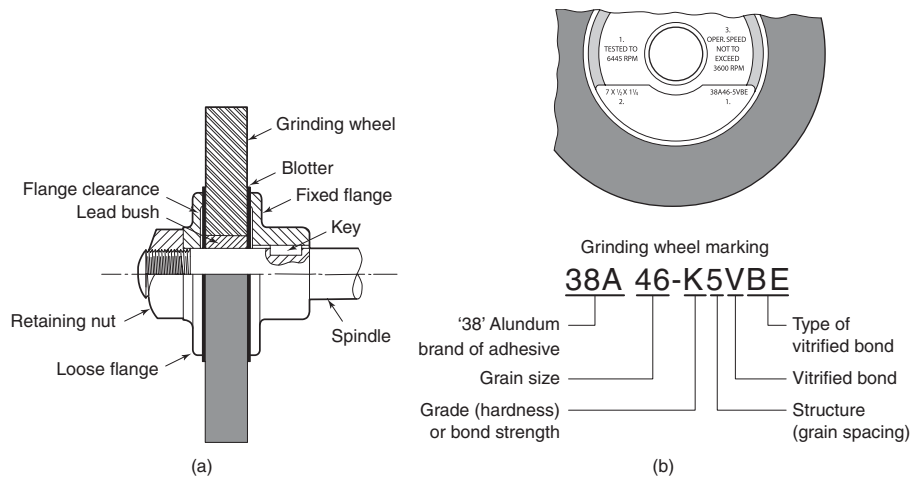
Mounting a grinding wheel: (a) the wheel mounting; (b) checking the new wheel (reproduced courtesy of Norton Grinding Wheel Co.)
